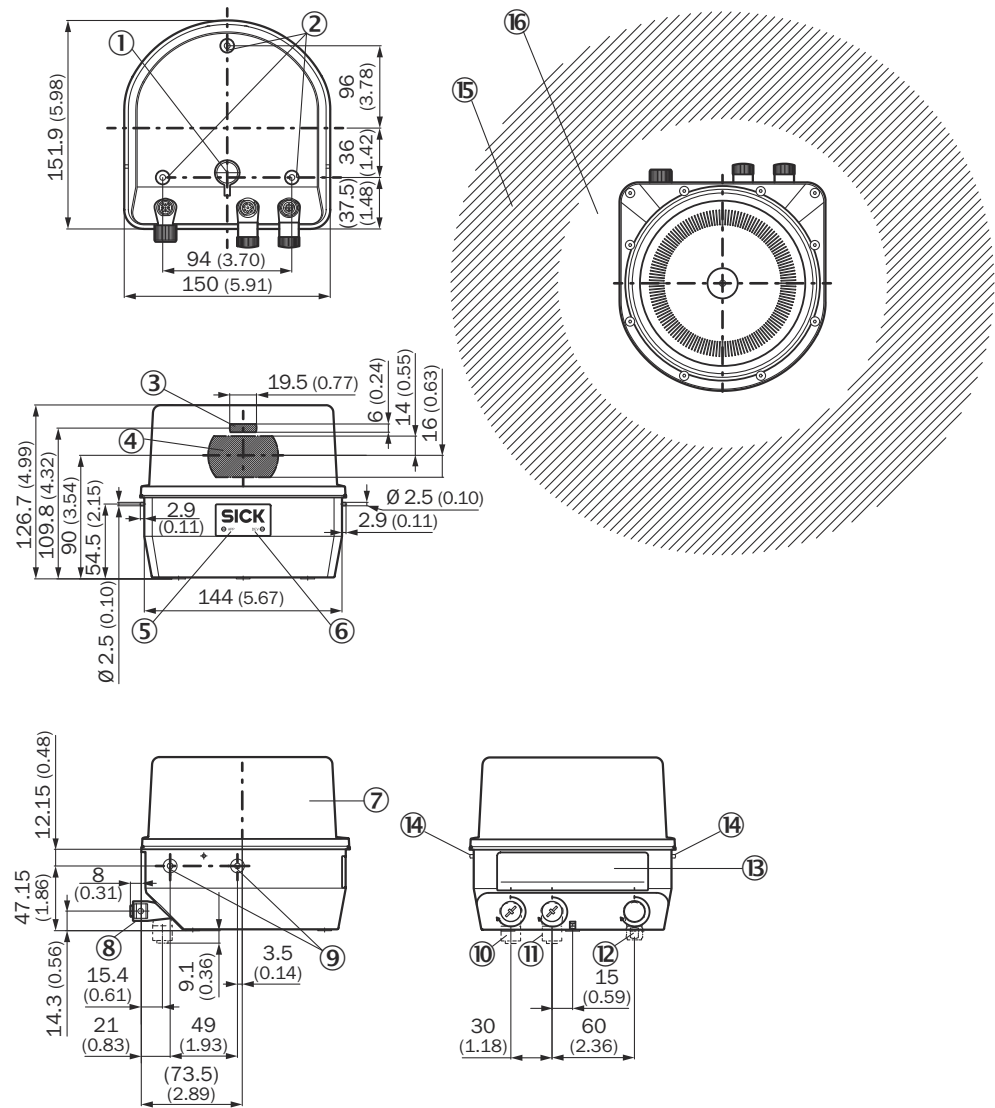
Device dimensions LRS4000; unit: mm (inch), decimal separator: period
